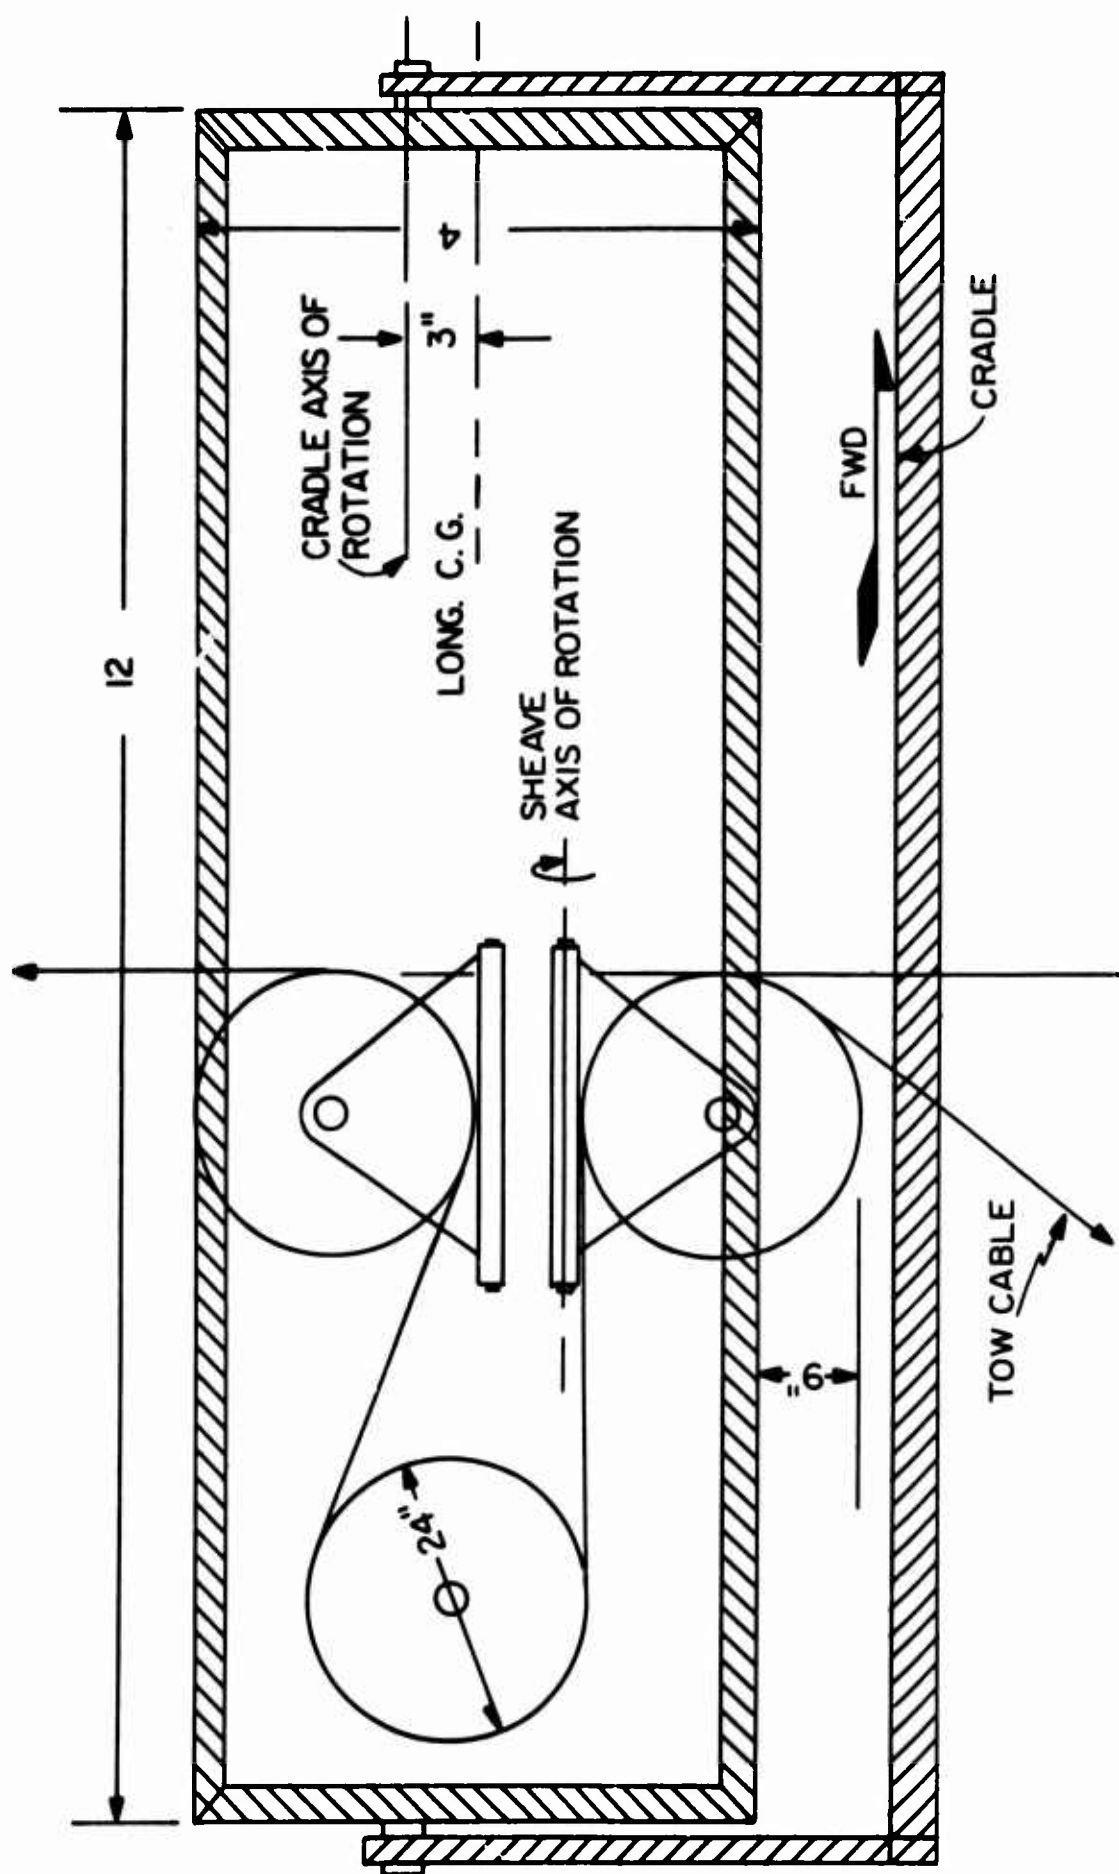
Tow-Sheaves and Cradle as mounted on Carriage (side view)
